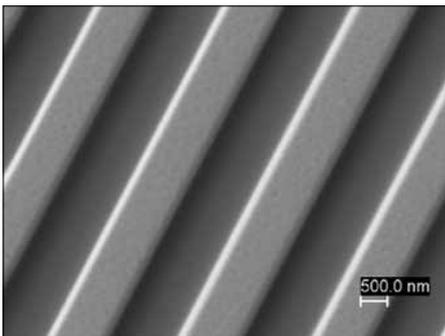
Tool-sets machined by a Focused Ion Beam (FIB) system
